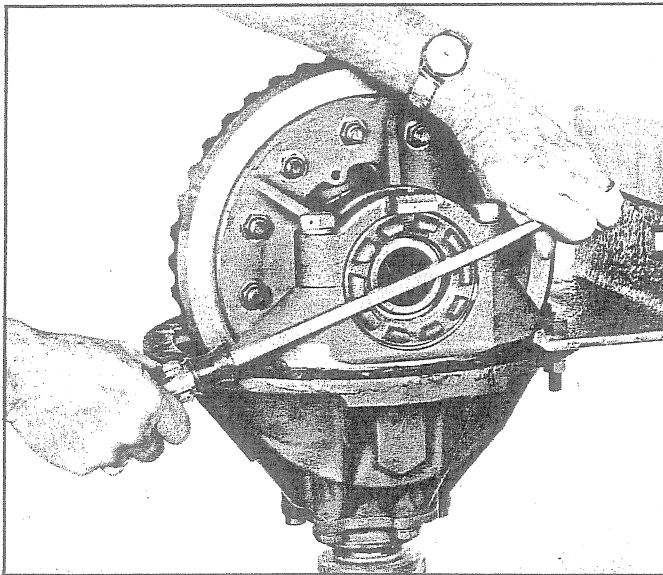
Adjusting Bearing Preload and/or Backlash
